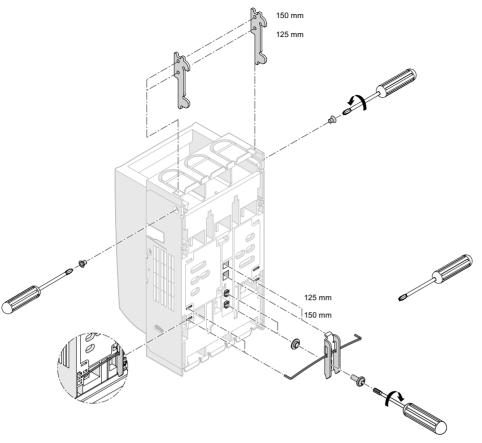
Mounting the fuse switch disconnector, sizes 00 and 1 onto a standard rail (1)
